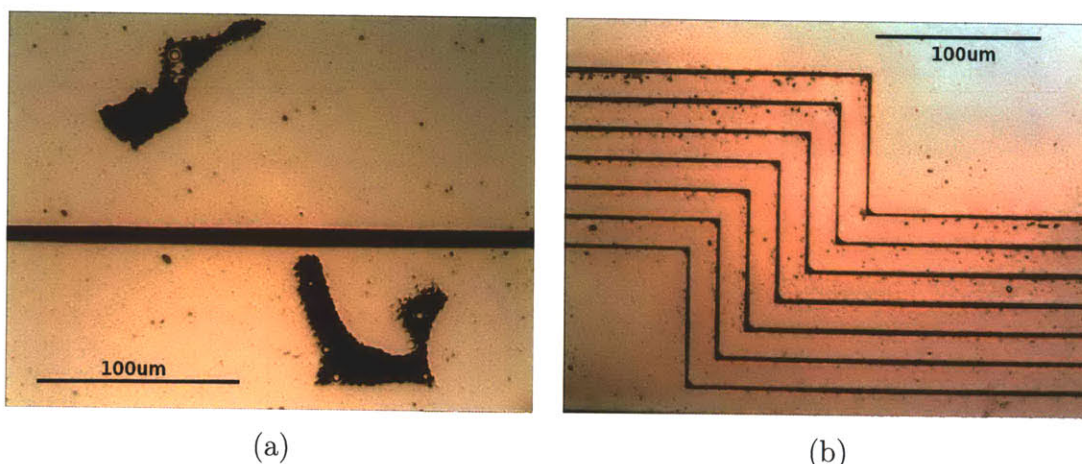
Trap fabrication defects: (a) holes in electroplated gold layer due to contamination (b) non-uniform features in hard-contact lithography, probably due to photoresist edge bead.
